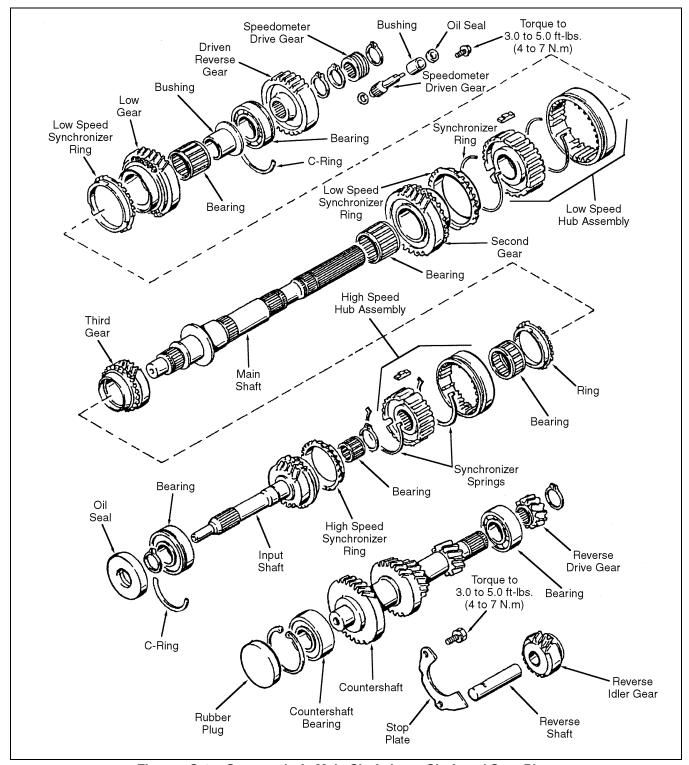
G-25. Countershaft, Main Shaft, Input Shaft and Stop Plate
